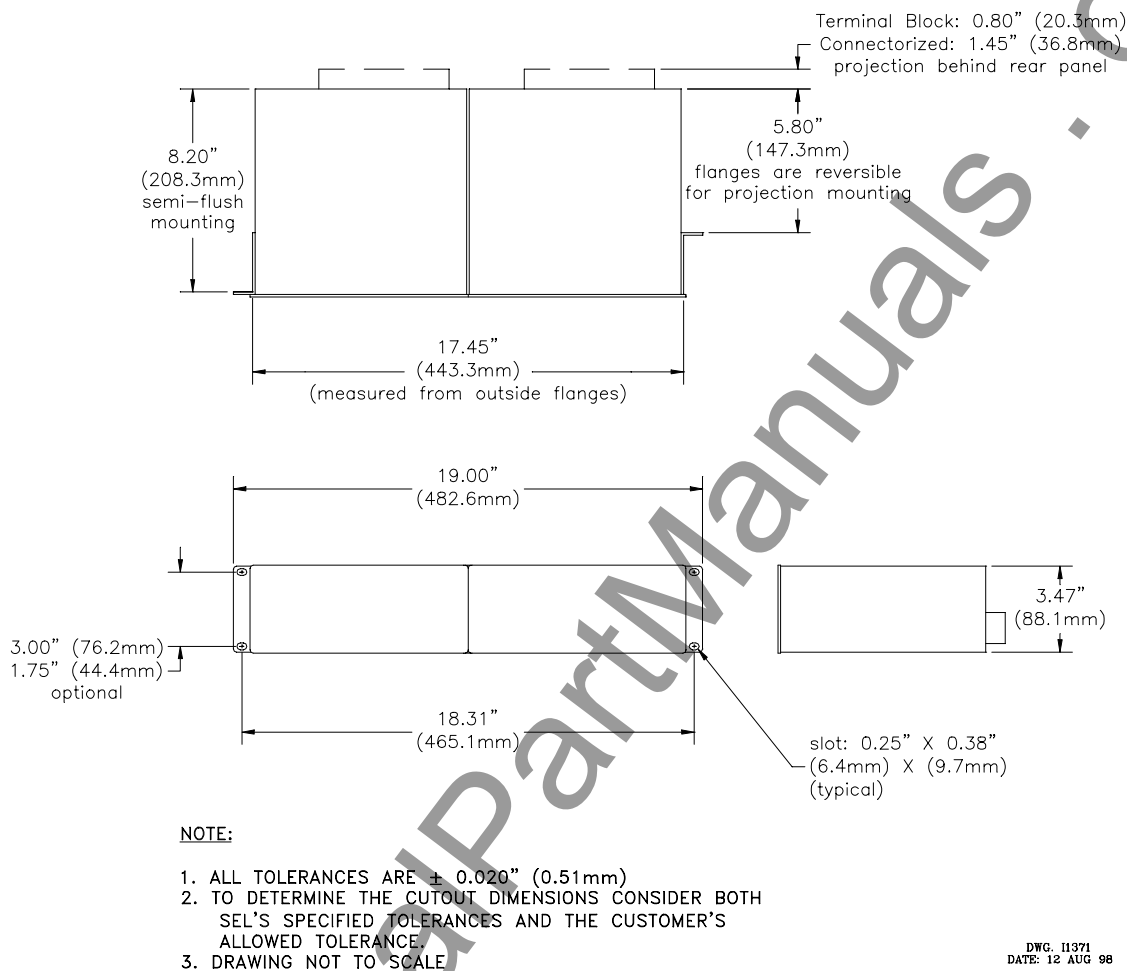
Relay Dimensions and Drill Plan for Mounting Two SEL-500 Series Relays Together Using Mounting Block (SEL P/N 9101)
